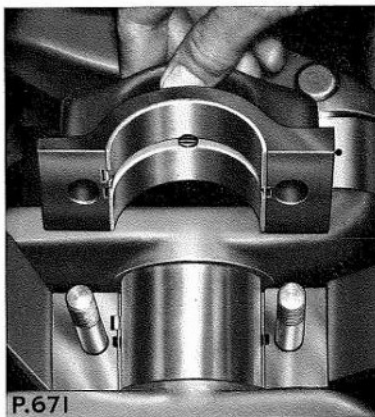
Crankshaft main bearings, showing the position of the bearing locating lips and the mating housing recesses
